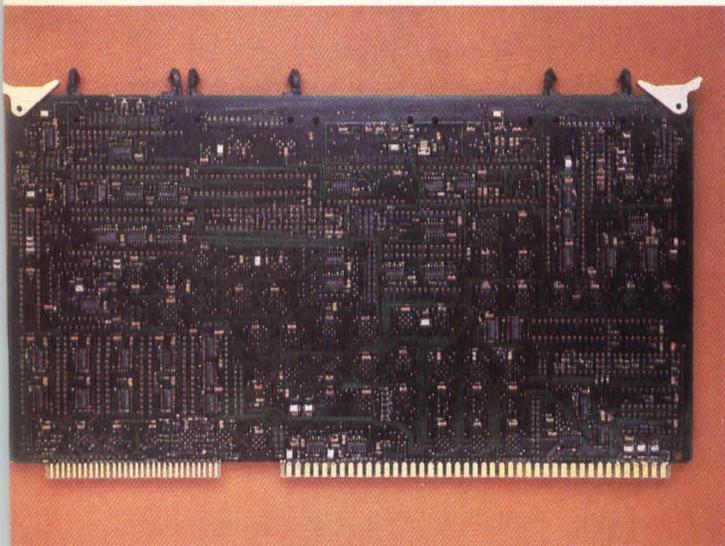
The Little Machine board makes extensive use of surface mount and SIP devices.
